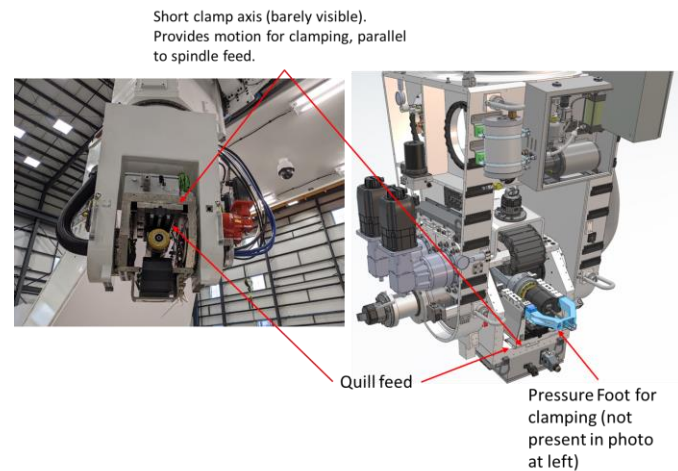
Two-rotary-axis machine head with additional linear axes for clamping and spindle feed.
